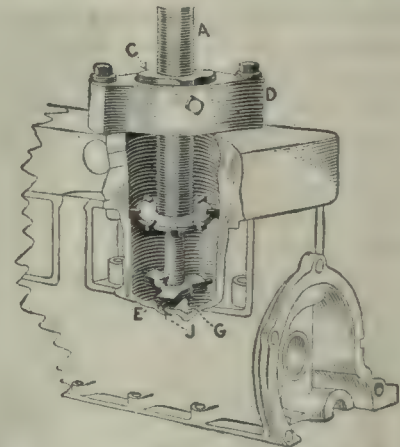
ANOTHER VIEW OF THE REBORING MACHINE
